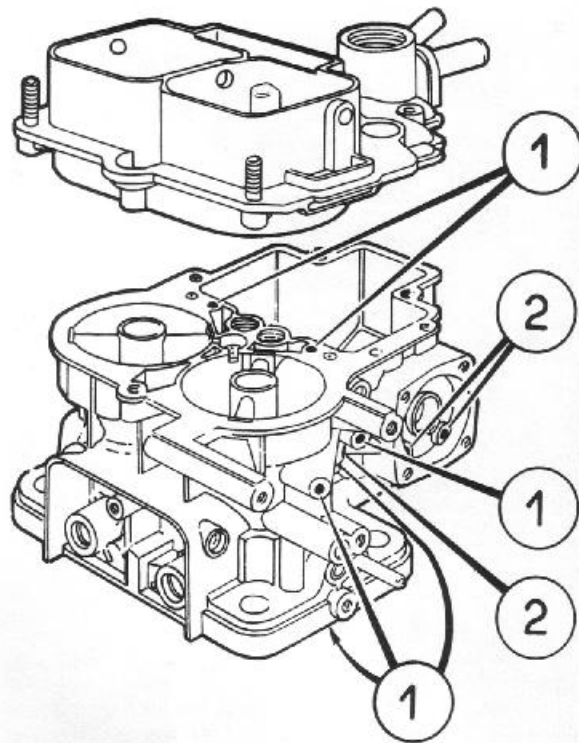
Location of the internal channels of the carburettor body (Sec 7)
